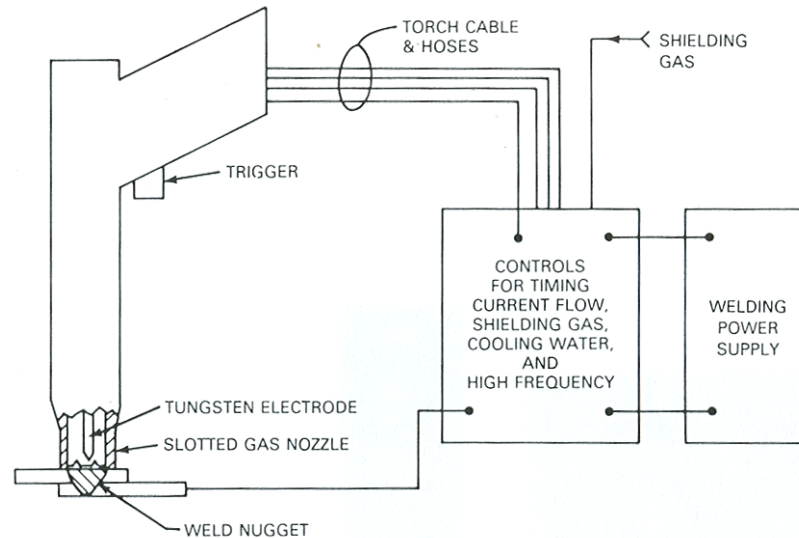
Manual tungsten inert gas spot welding (AWS, 1991)
